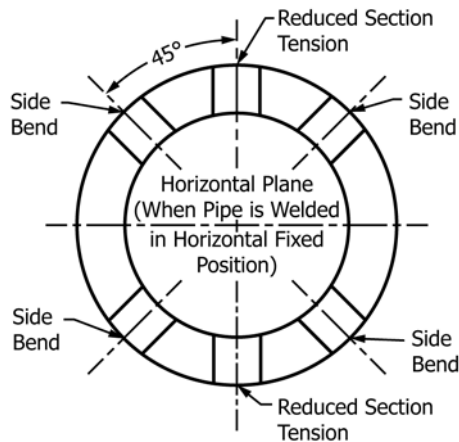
Order of Removal of Test Specimens from Welded Pipe or Cylindrical Castings over $\frac{3}{4}$ in. [19.0 mm] Thick (May be Used for Thicknesses $\frac{3}{8}$ to $\frac{1}{4}$ in. [9.5 to 19.0 mm])
